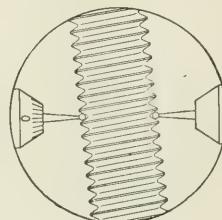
Optical Screw Thread Calipers. Fig. 178.
